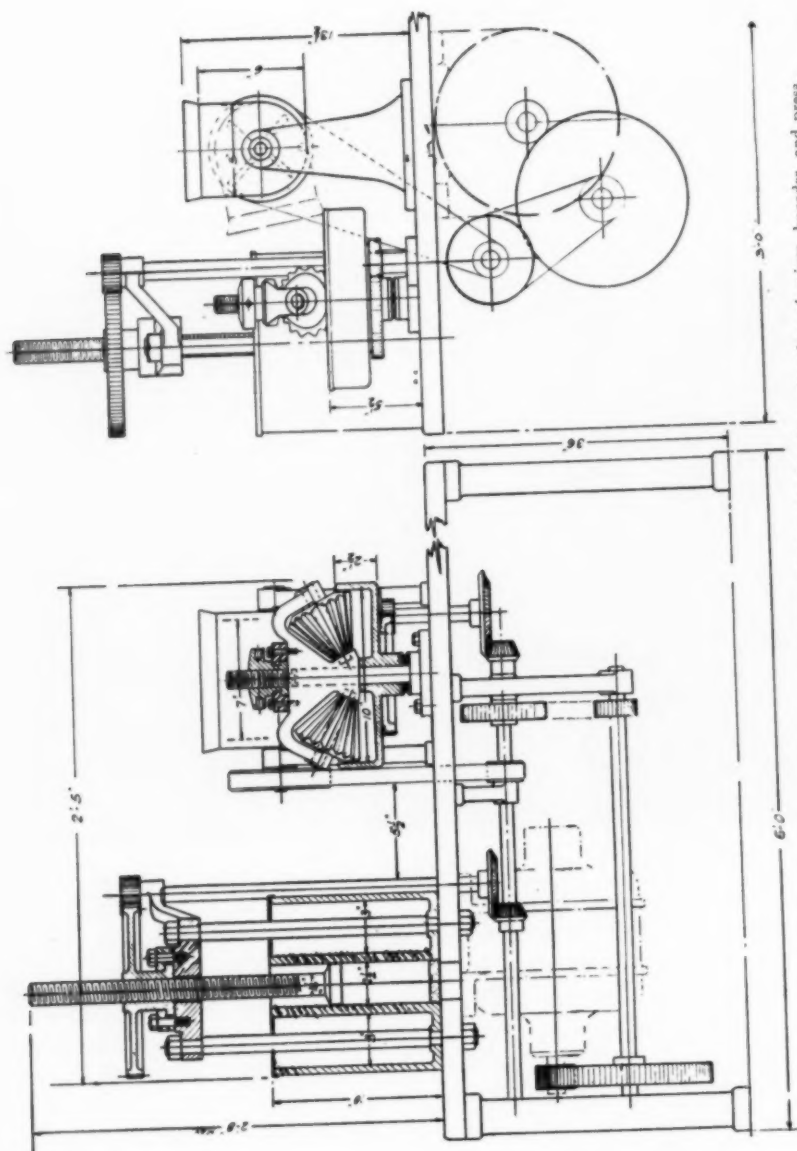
Line drawing of miniature laboratory equipment showing details of construction of mixer, kneader, and press.
